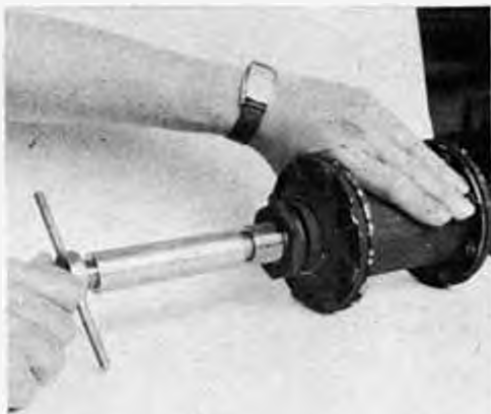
Shows retracting tool being inserted into the HS-1 mechanism.
